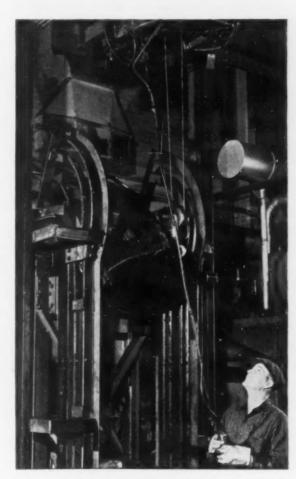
Electric hoist and tilting device load barrels of parts into hopper to feed hardening furnace.
